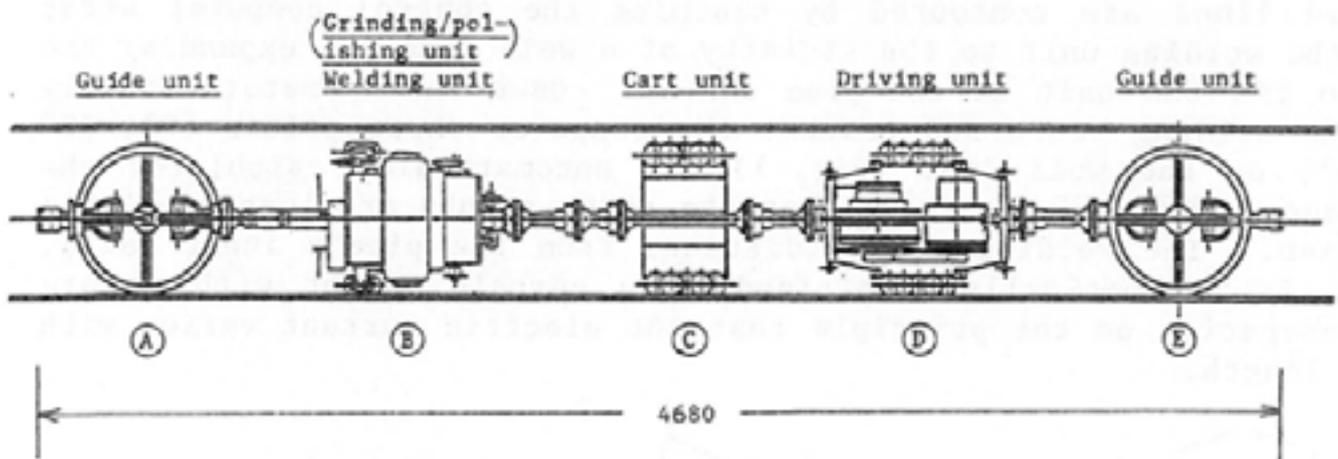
Osaka Gas Co./Sumitomo Metal Model; Internal Welding Robot system.
